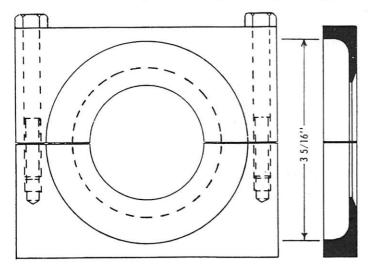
Puller Plate, 3-5/16" Diameter Recess
